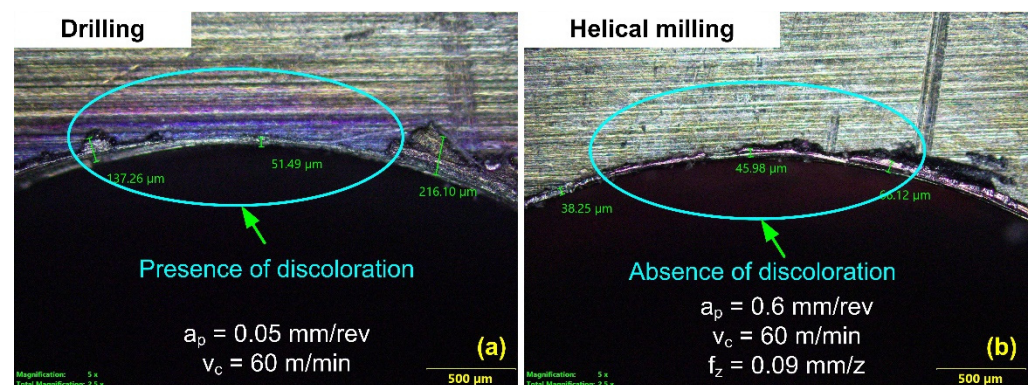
(a) Workpiece coloration indicating HAZ in a drilled hole. (b) Absence of HAZ in a helical milled hole.
